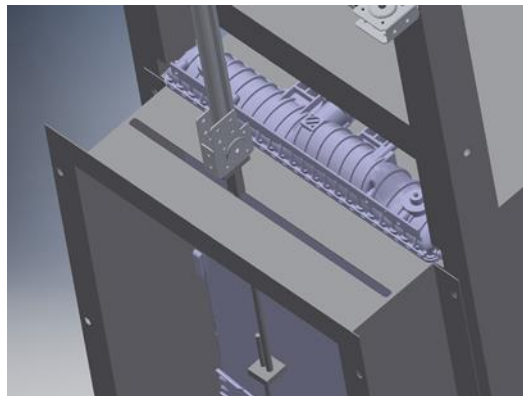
CAD drawing of the hot-wire probe and traversing system
